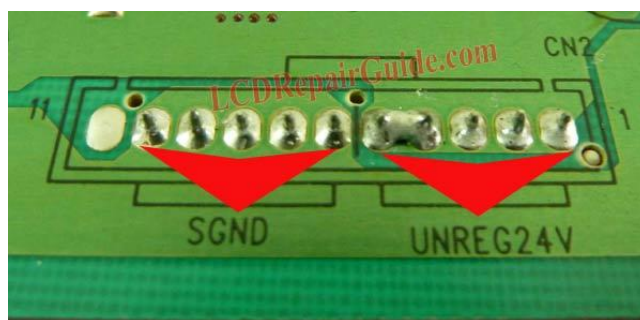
PSU board CN2 connector is supply 24V to inverter board
